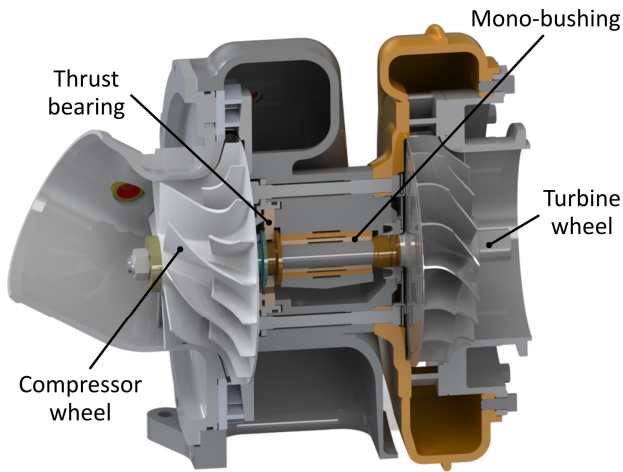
Visual appearance of the turbocharger TKR 11N3 (D-160)
